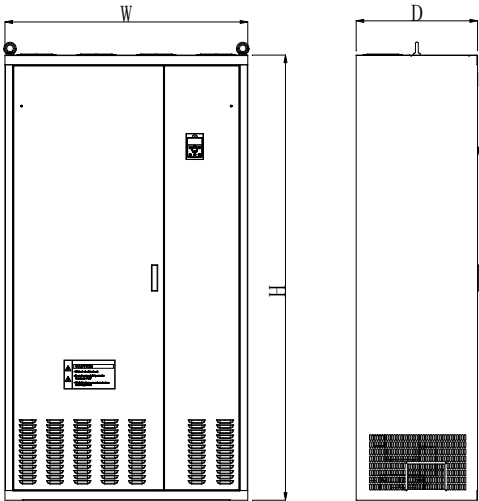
Schematic diagram of external dimensions and installation dimensions of 380V (4T) 500-800kW VFD Outline
